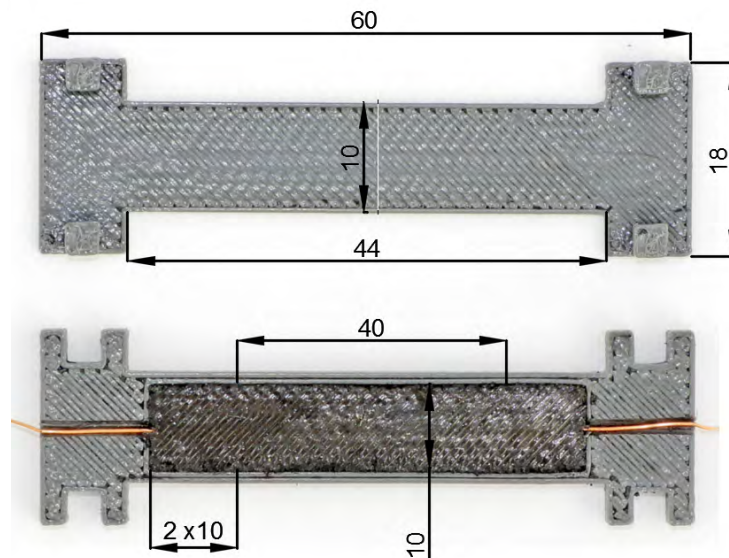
Dimensions of one sample and its cast on millimeters.
